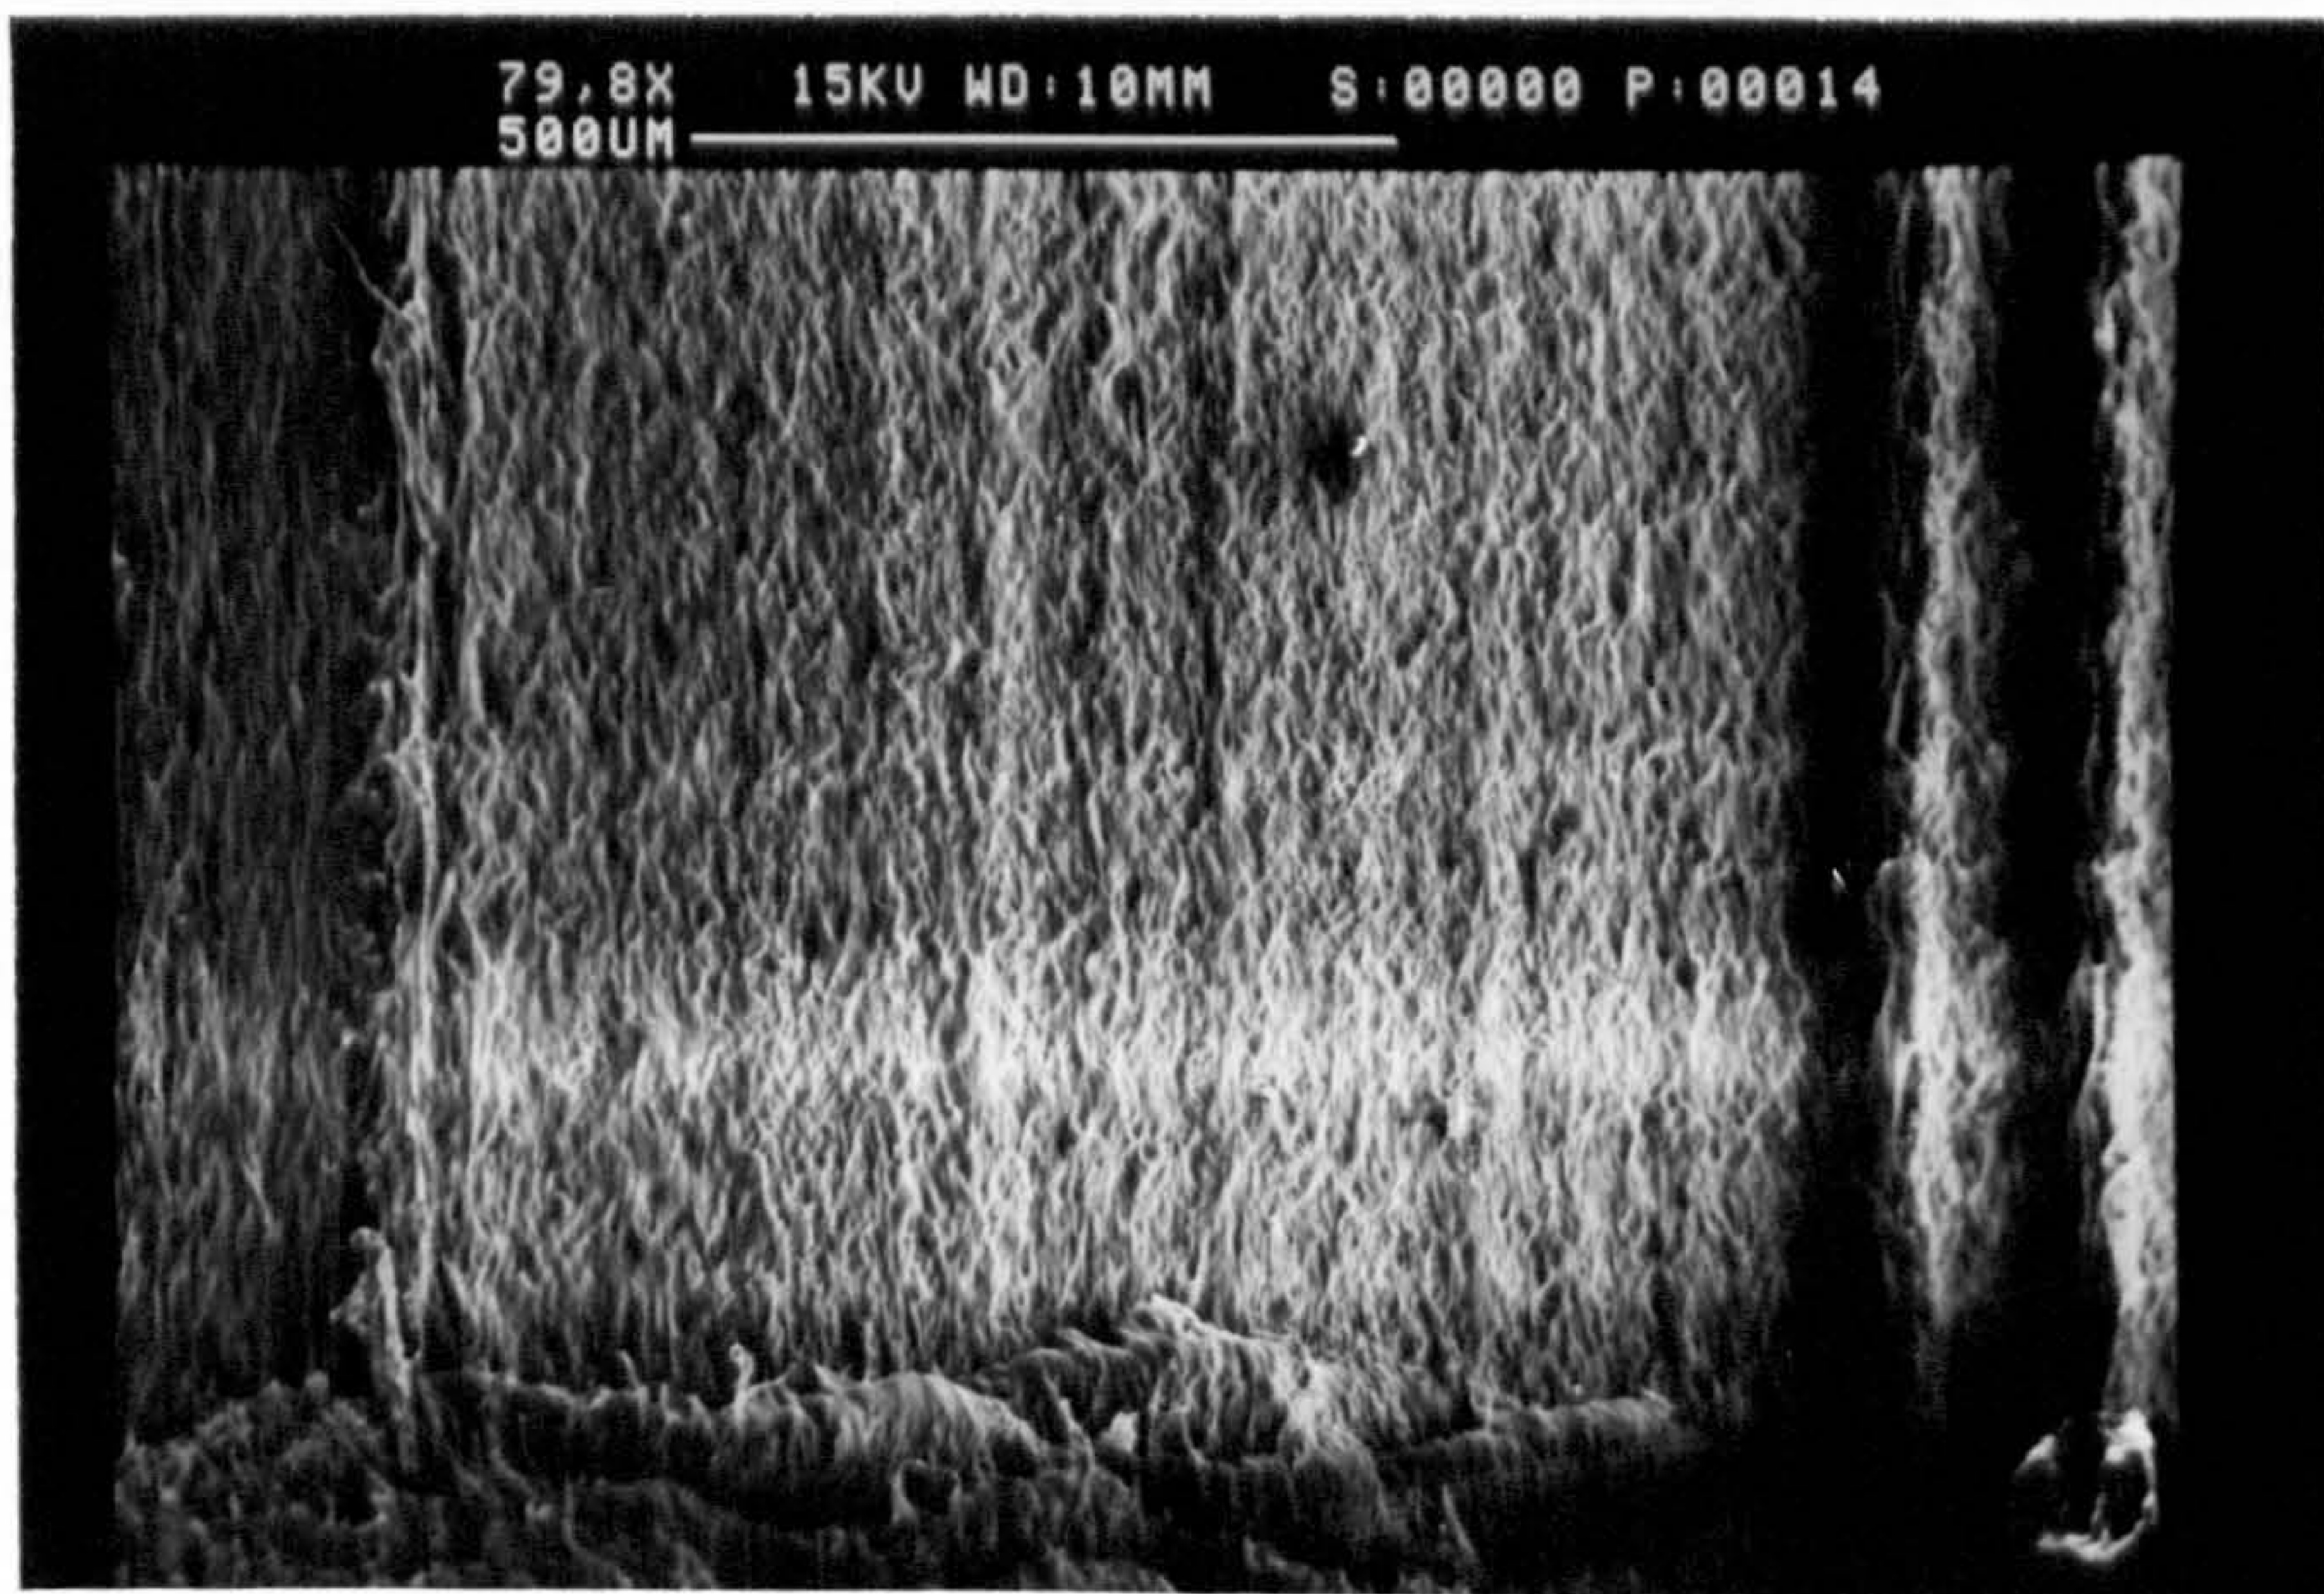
PVC machined surface produced at  $-20^\circ$  rake angle showing fibrillar structure. (Speed = 30 m/min, feed = 0.25 mm/rev)
